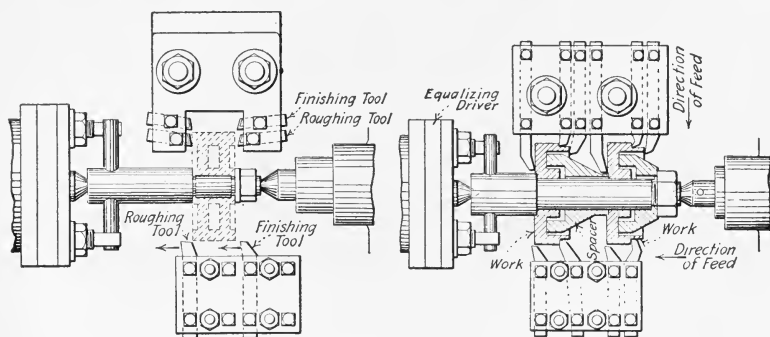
Examples of work for which the Fay lathe is adapted.
